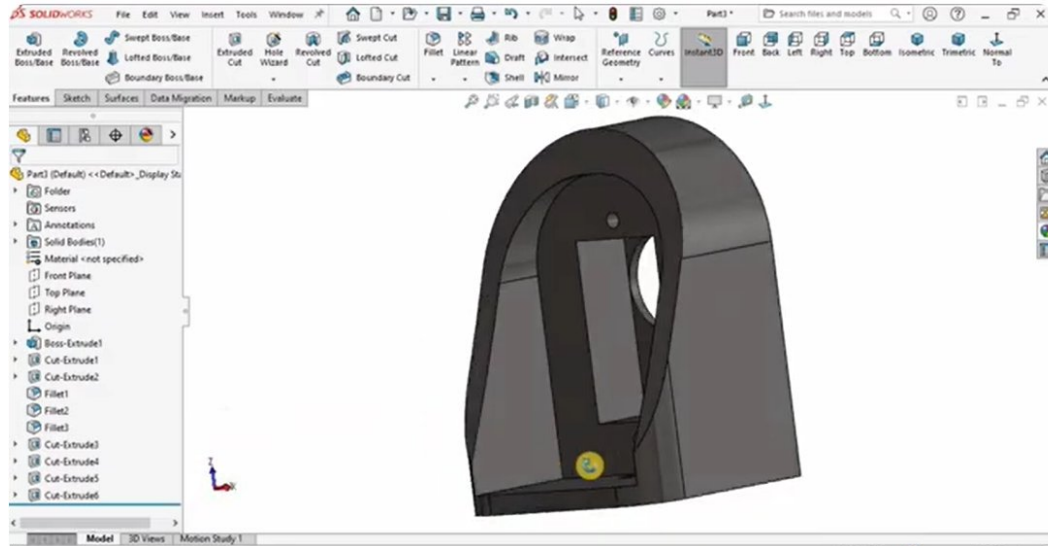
Part 5 — Shoulder Housing | SolidWorks 2022
